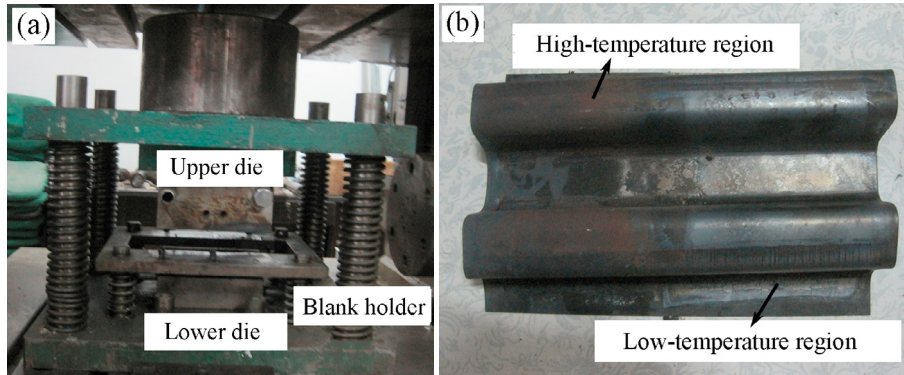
Tooling system for hot-stamped M-shaped part (a); formed M-shaped part (b).
